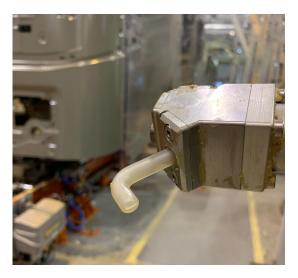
Sealing bead sprayed by the PLA nozzle.
